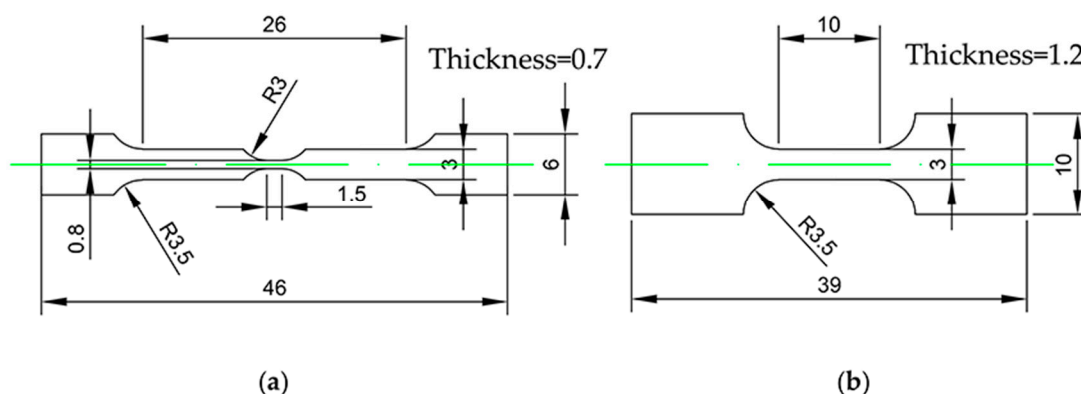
Geometry of the tensile test specimens. (a) In situ test specimen, (b) ex situ test specimen. Units, mm.
